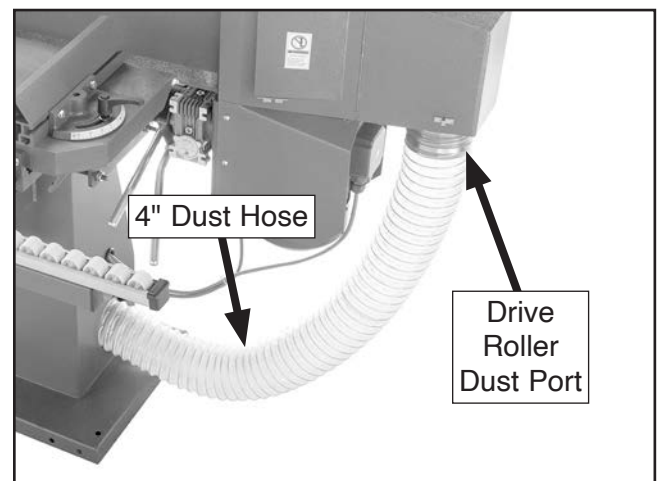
Dust hose installed on drive roller dust port (drive roller doors closed for clarity).
